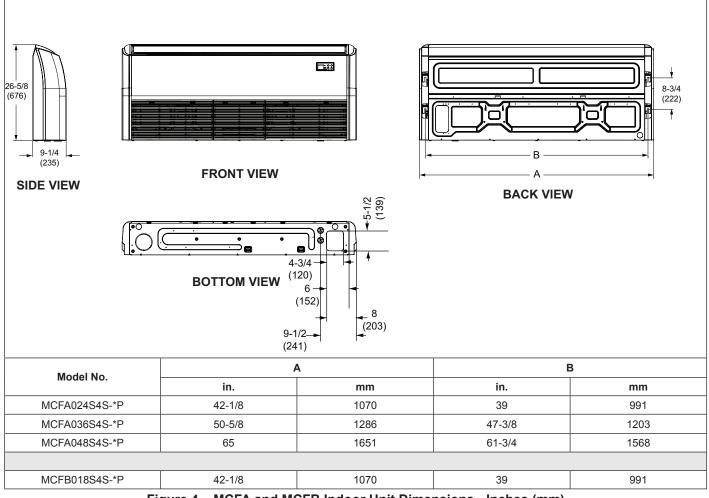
MCFA and MCFB Indoor Unit Dimensions - Inches (mm)
